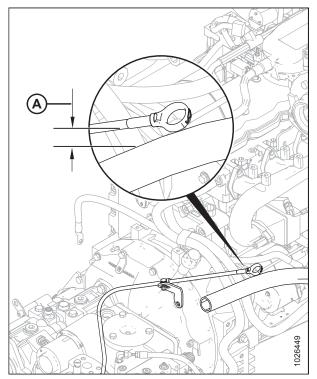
Gearbox Dipstick Assembly – View from Above A - 15–25 mm (9/16–1 in.)
